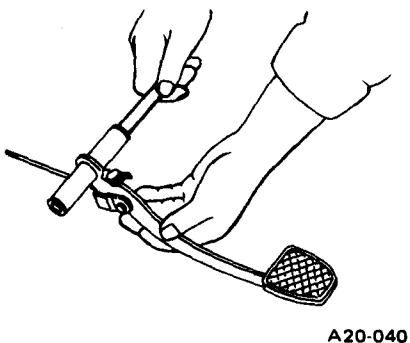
Inspecting play between bushing and shaft
